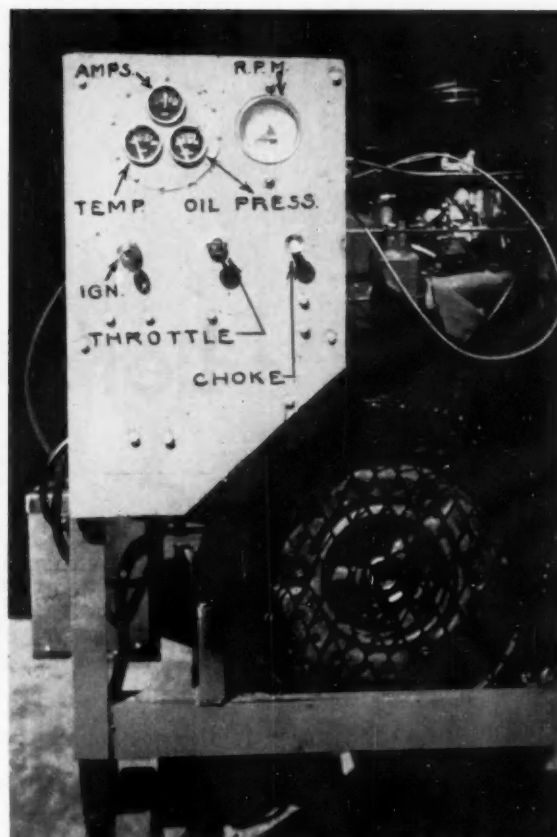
Control board of an engine run-in stand. The rebuilt engine is placed in the stand and run for 8 hr at no load. This shows up any defects in the engine.
